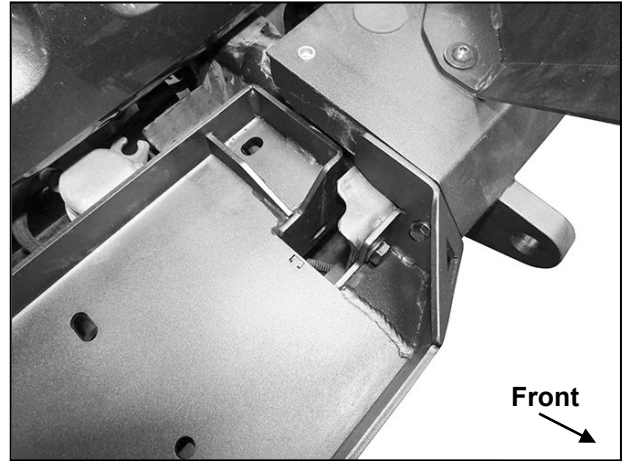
Attach driver/left side of Winch Tray to inside of opening in Bumper
